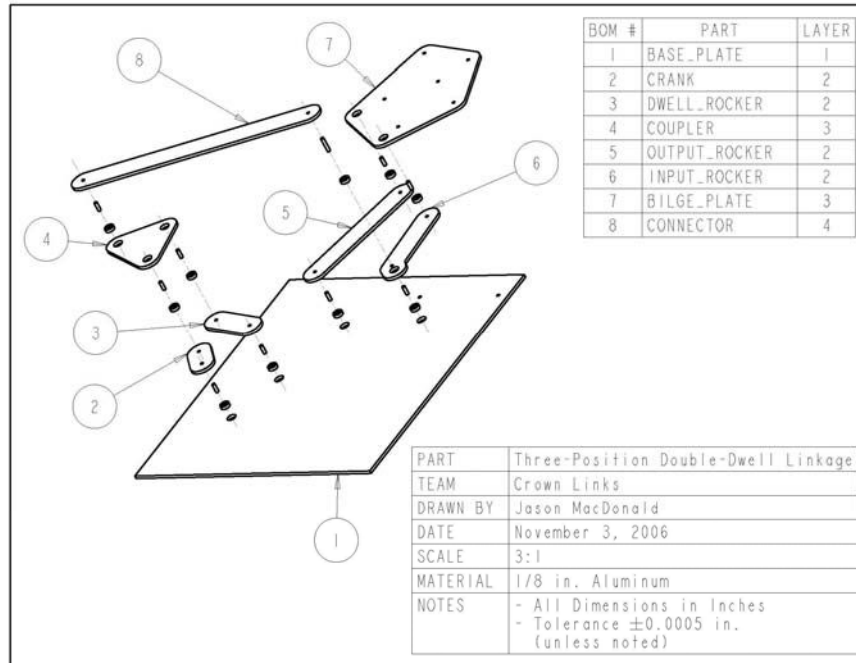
Exploded view of the linkage for assisting in the machine shop assembly task
